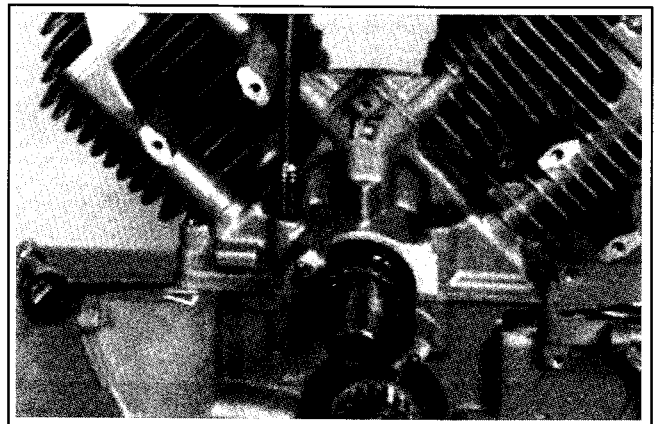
Removing the M8x70 mm Hex. Flange Screws.
